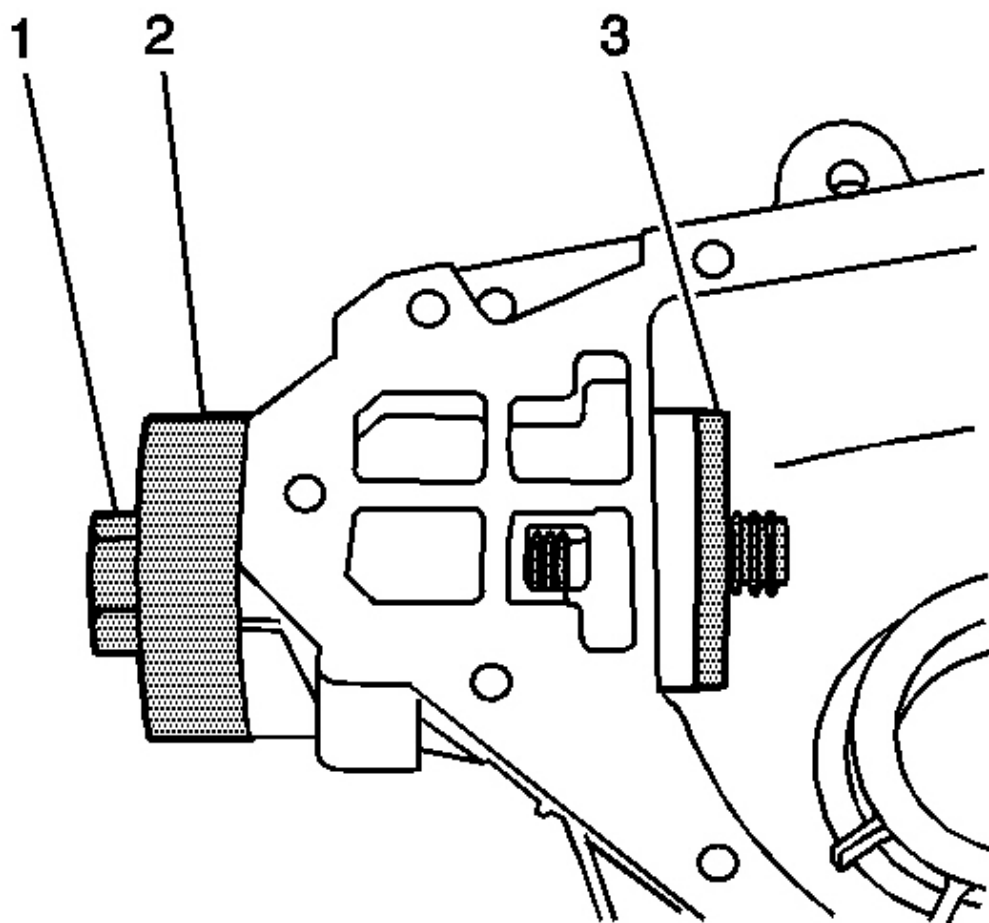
Identifying Special Tools J 45228-1, J 45228-2, & J 45228-5
